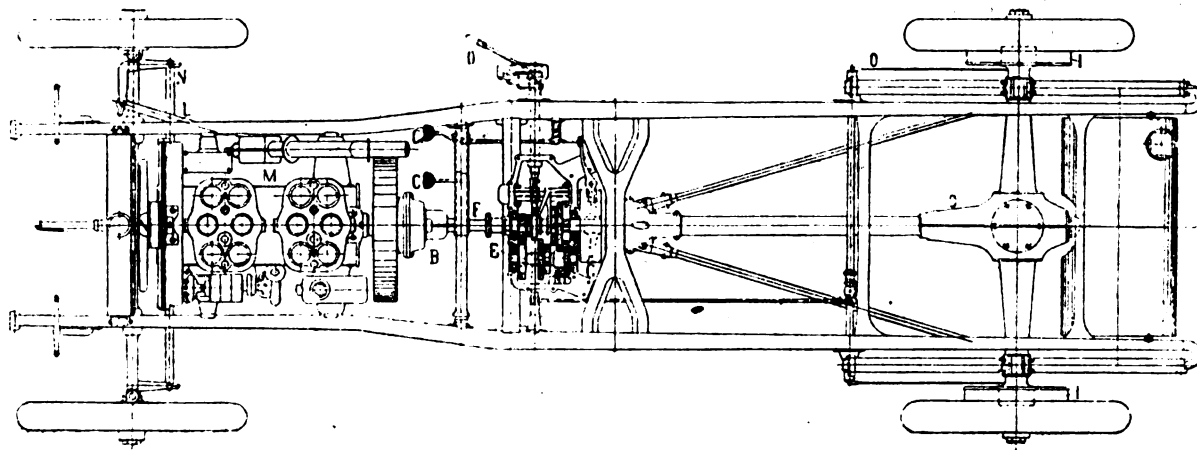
Plan of Chassis of Mercedes 35-h.p. Live Axle Car.
